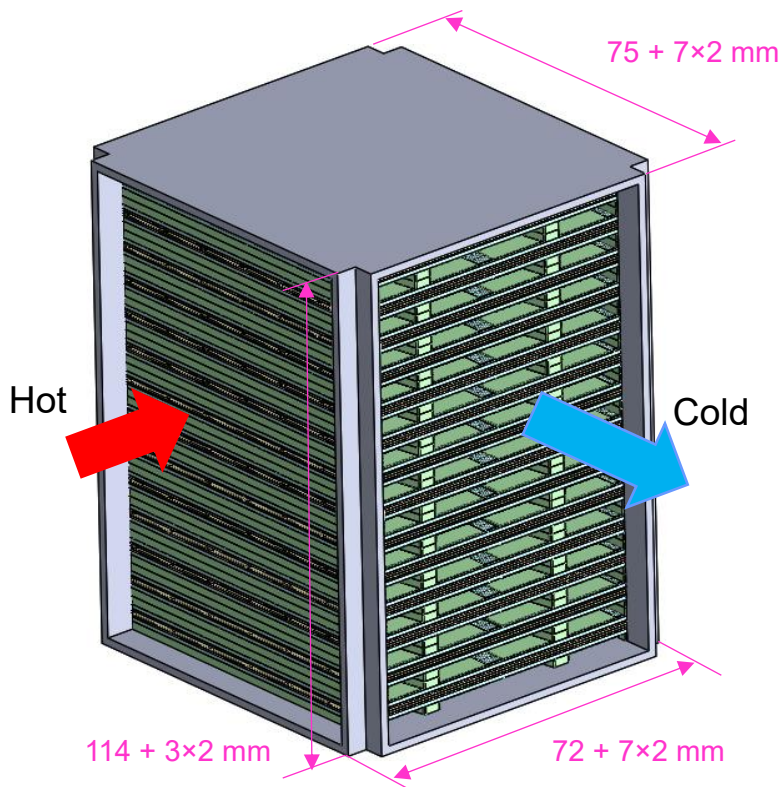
Medium-scale design with the welding interface frame (marked in gray)
